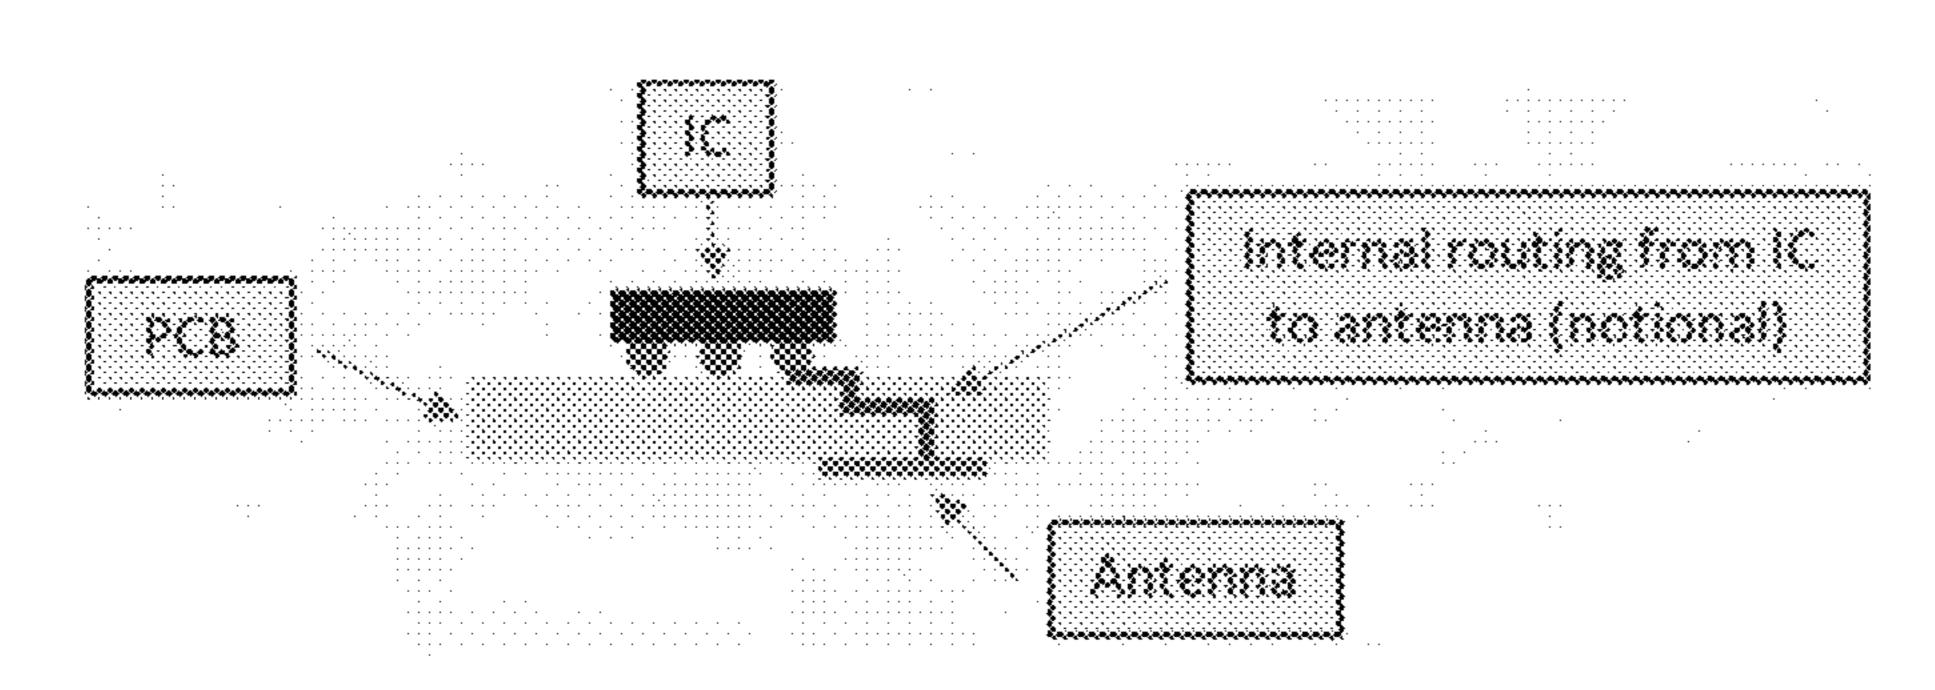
Side View of Typical Antenna Routing from IC Through PCB
